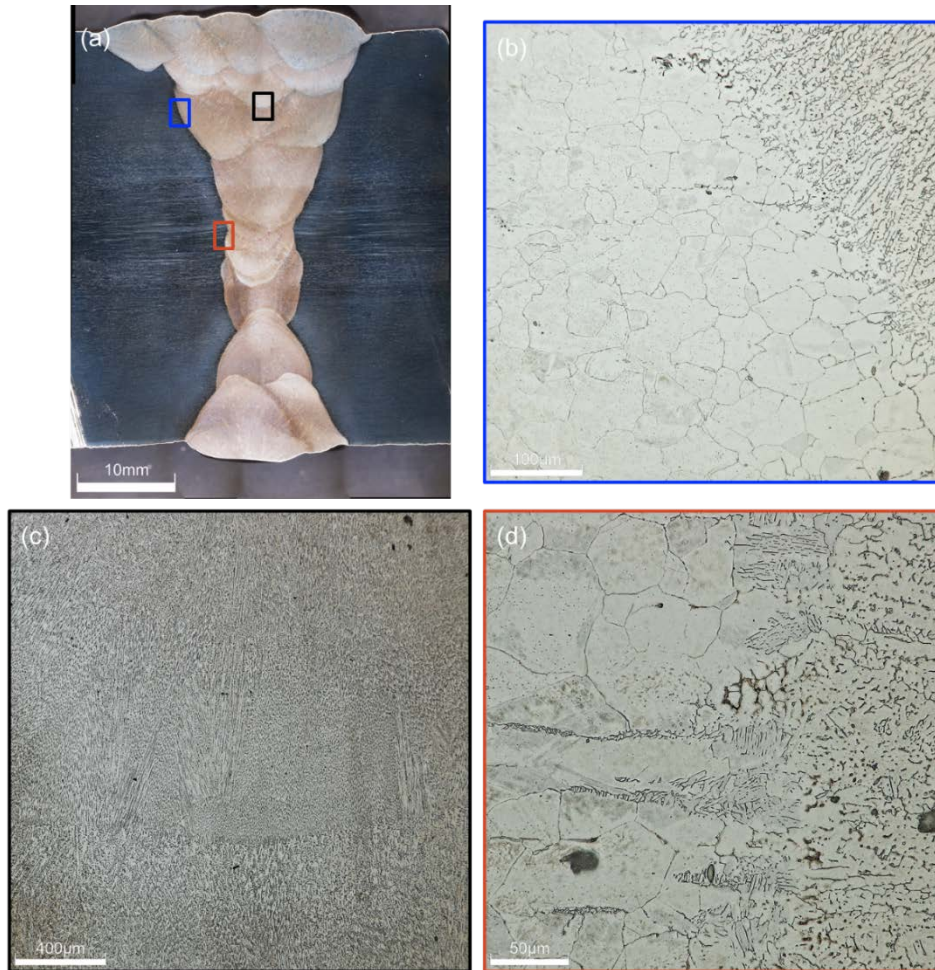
Microscopic examination of (a) seam wall weld (original wall weld), (b) HAZ/PMZ near top of weld, (c) FZ near top of welding showing a weld pass transition, and (d) HAZ/PMZ near weld root.
